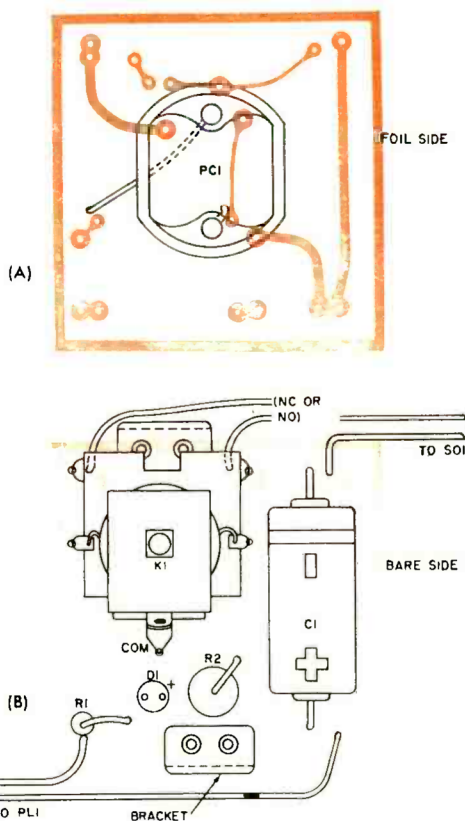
Here's the component layout. Photocell PC1 is mounted on the foil side of the circuit board as shown in (A). All of the other parts are mounted on the bare side of the board as shown in (B).
